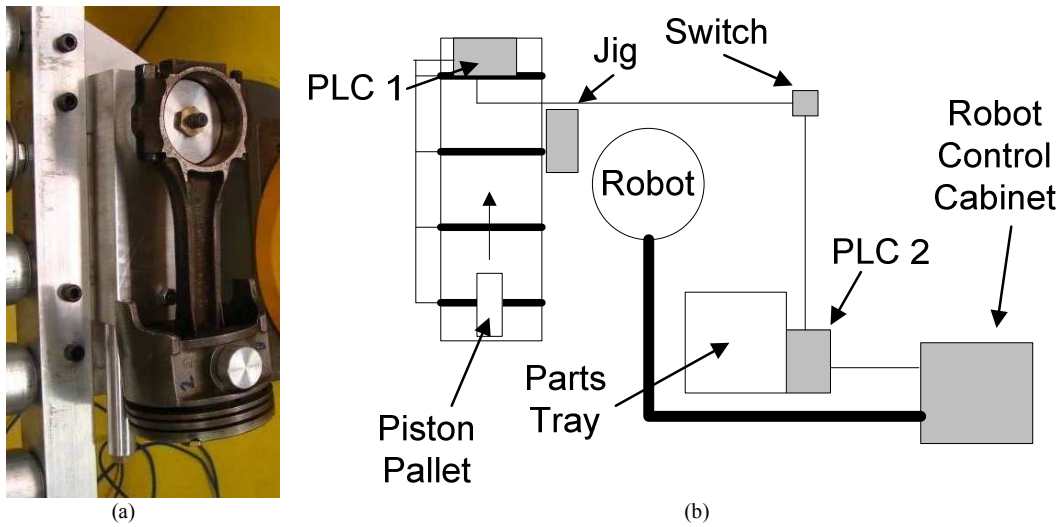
Automotive piston assembly utilizing system integration - (a) automotive piston construction jig, and (b) schematic.
